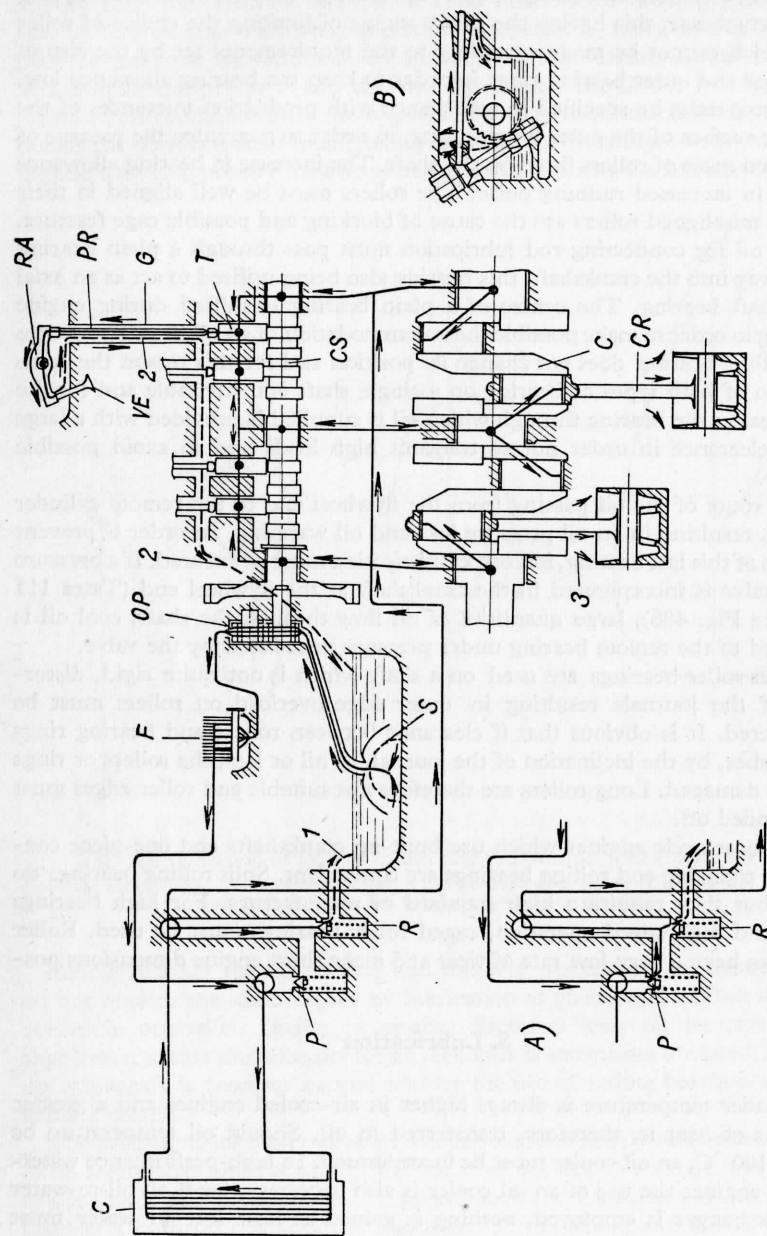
Lubrication of a Tatra engine with an oil pump in the crankcase. OP — oil pump, F — oil filter, P — relief valve, C — oil cooler, R — reducing valve.
